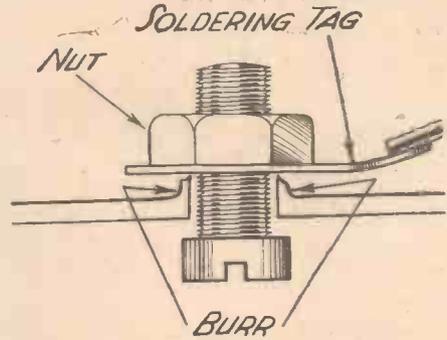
Leave the burr caused by the drill to assist in making good contact.
